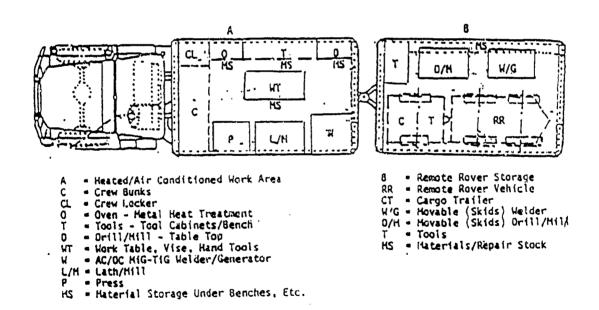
Remanufacture Vehicle - Internal Equipment Schematics
